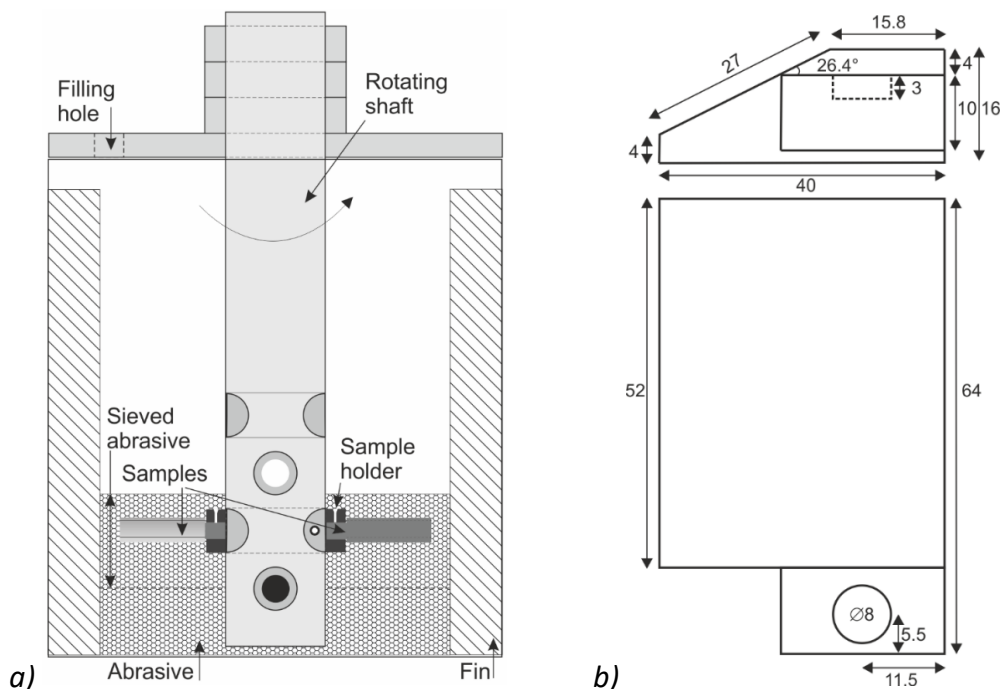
The dry-pot test setup for the cutting edge shaped samples: a) a schematic picture of the test chamber and b) a drawing of the sample [Publication III].
